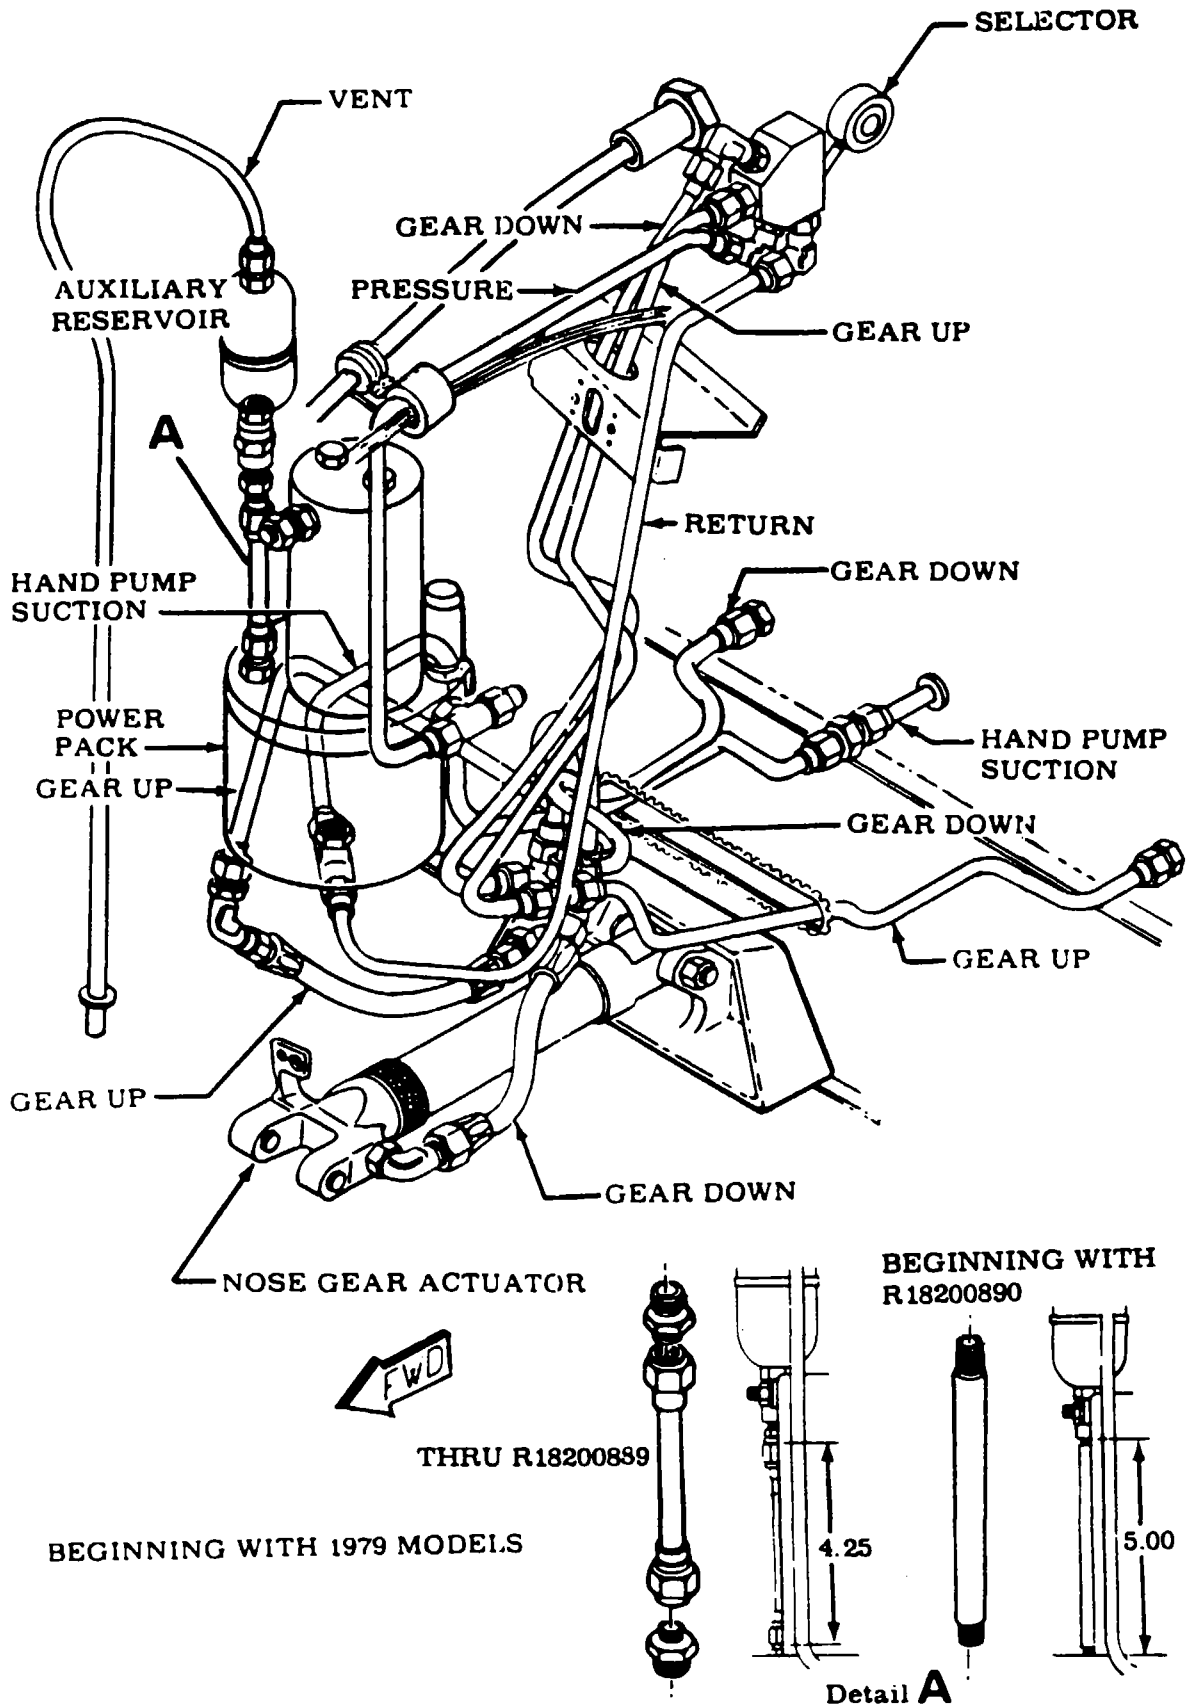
Landing Gear System Component Locator (Sheet 2 of 3)
